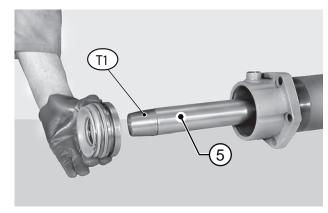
Remove tool T1 (See drawing T1 p. 45) and apply it to the opposite side of the piston (5).
